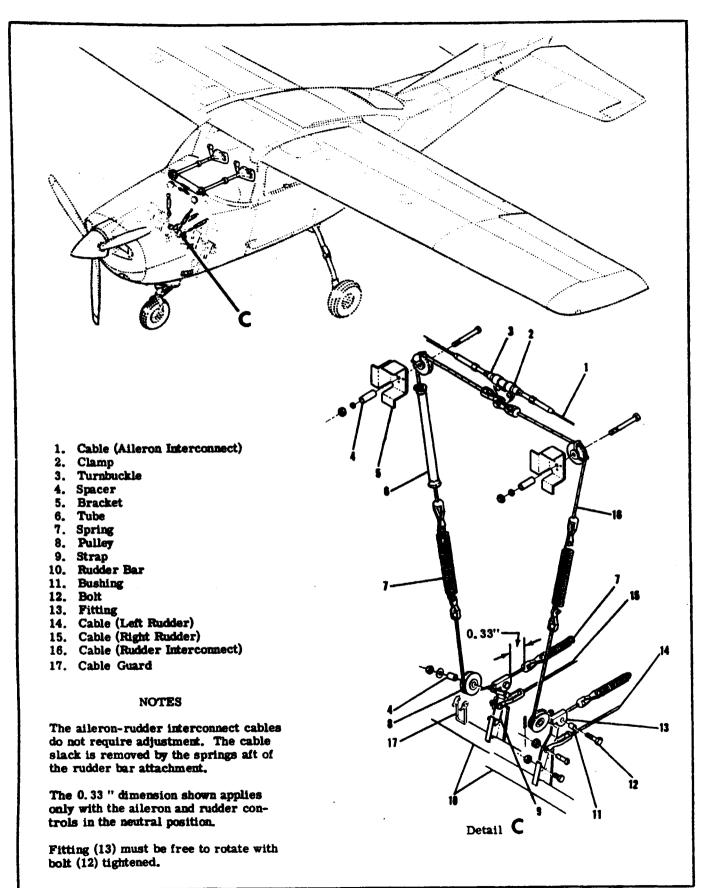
Control Column Installation (Sheet 5 of 5)
